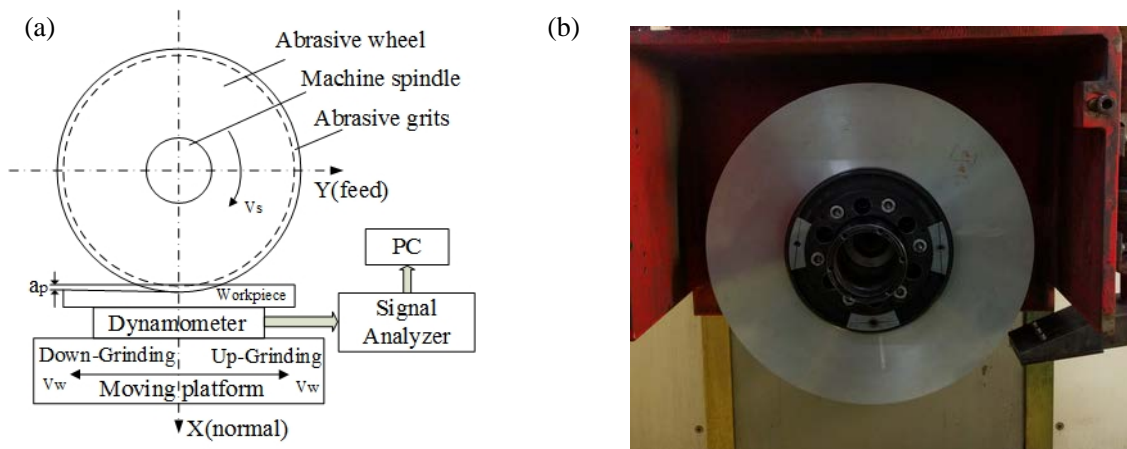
a Test platform of abrasive grinding dynamics, b Surface grinding wheel
